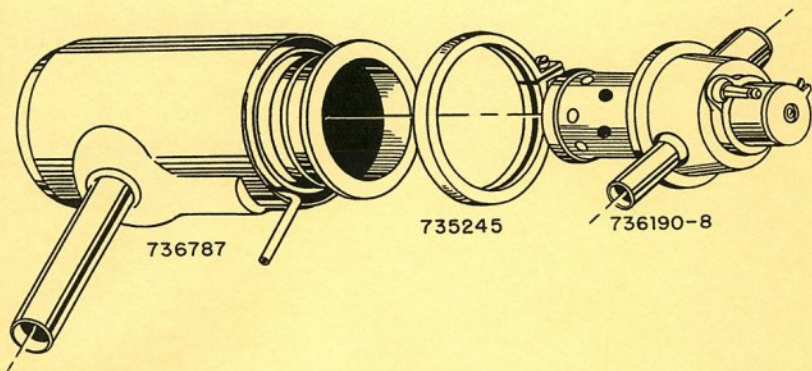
HEAT EXCHANGER & BURNER ASSEMBLY 736788
